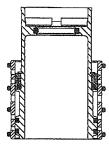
DRY LUBE APA VALVE ASSEMBLY NEW P/N 11-6152ADL0 AND C10526
